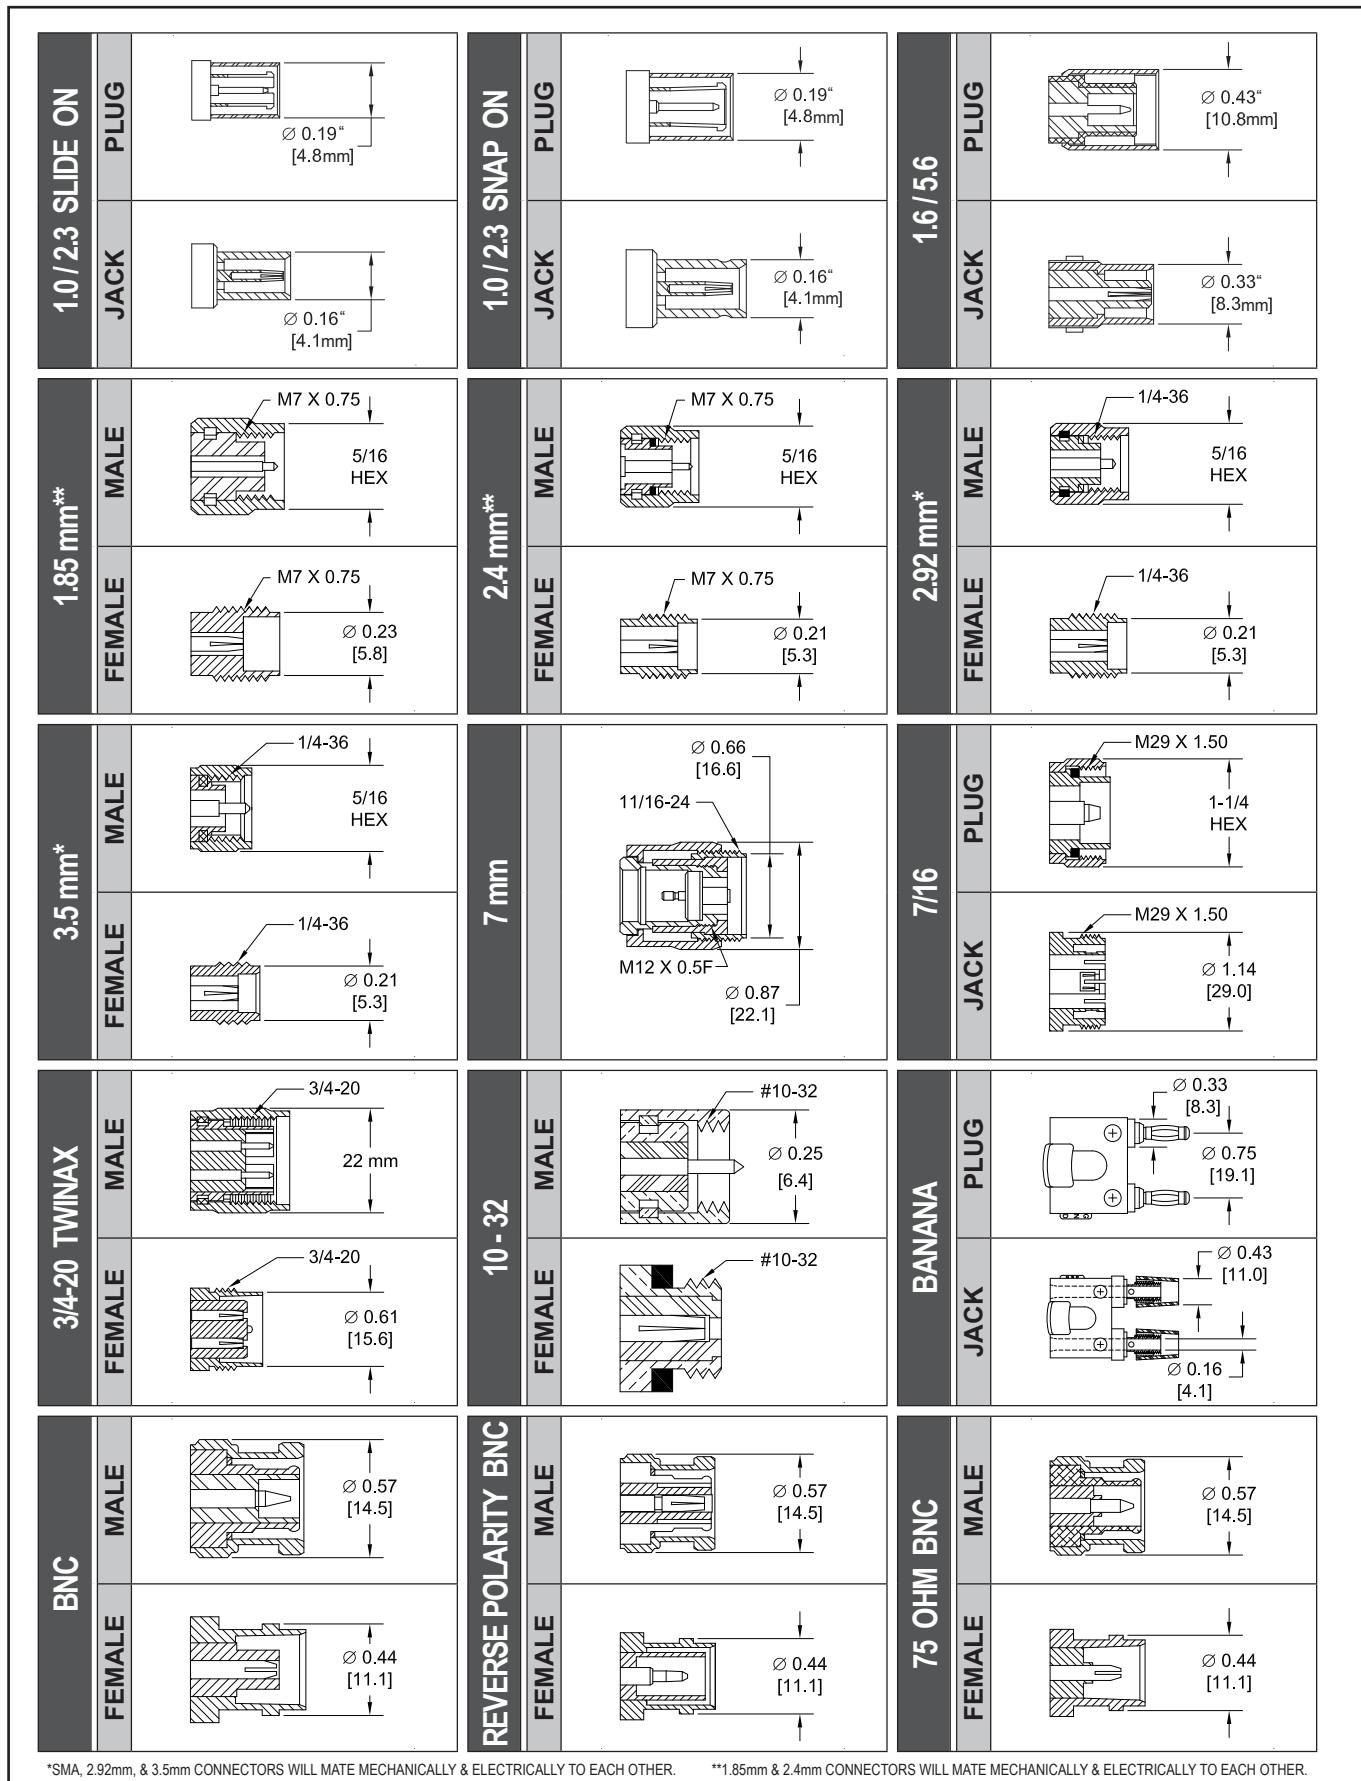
A – Connector side views, set 1 of 4. (Courtesy of Pasternak)
